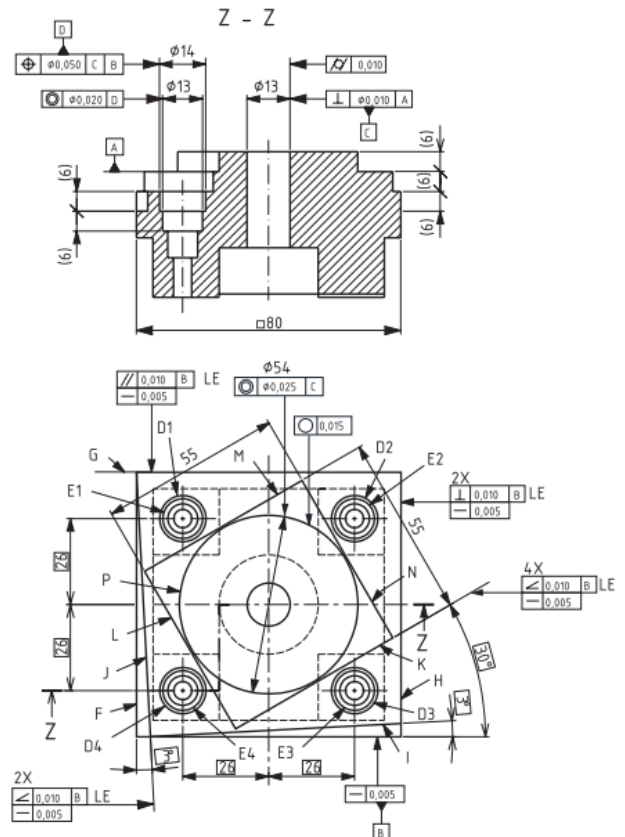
Test piece ISO 10791-7, M1\_80 (dimensions in mm) [3].
